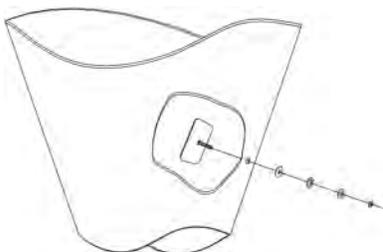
Mounting Bin Air Pad from the Inside of Vessel
